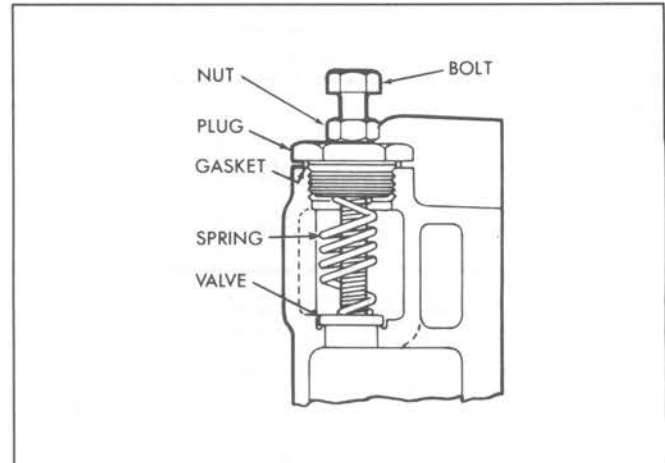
Bypass Valve with Modified Valve Plug Installed
